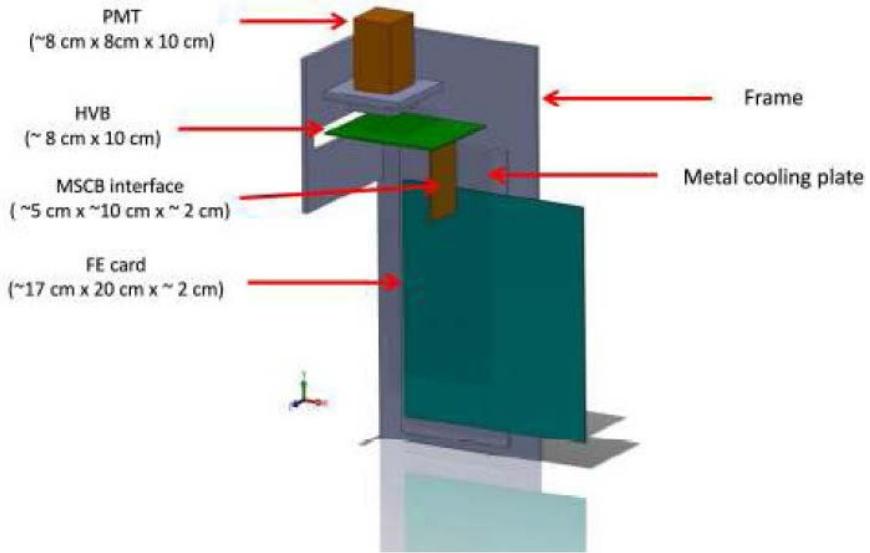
PMT layout arrangement showing the multi-anode PMT, the high-voltage board (HVB), the MIDAS slow control bus (MSCB) and the front-end digitizer card (FE).
